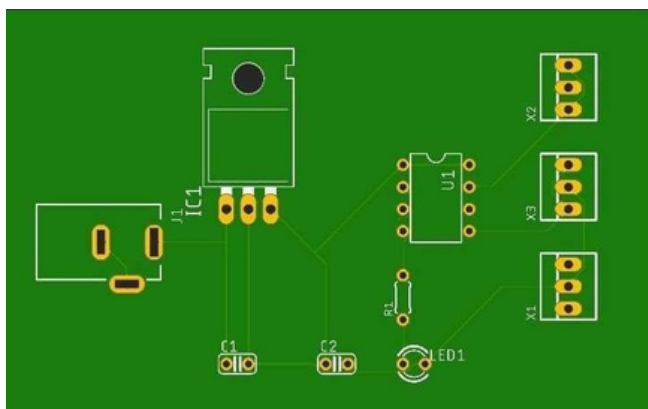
PCB layout of Transmitter circuit (Top) Fig. 3.9 PCB layout of Transmitter circuit (Bottom)
